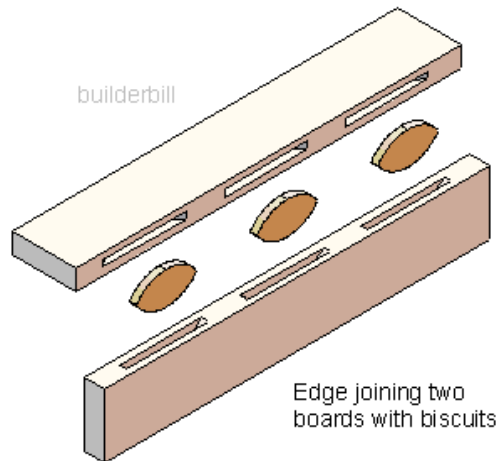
Biscuit Joint Exploded View (Biscuit, n.d.)
